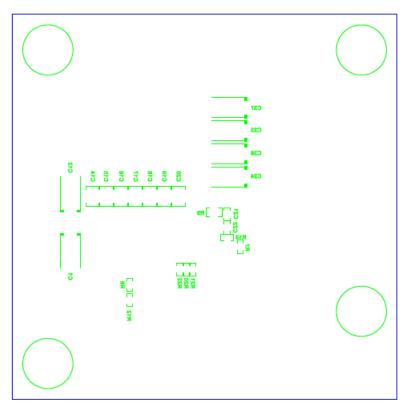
PWR-847EVM Bottom Solder Mask (Top View)
